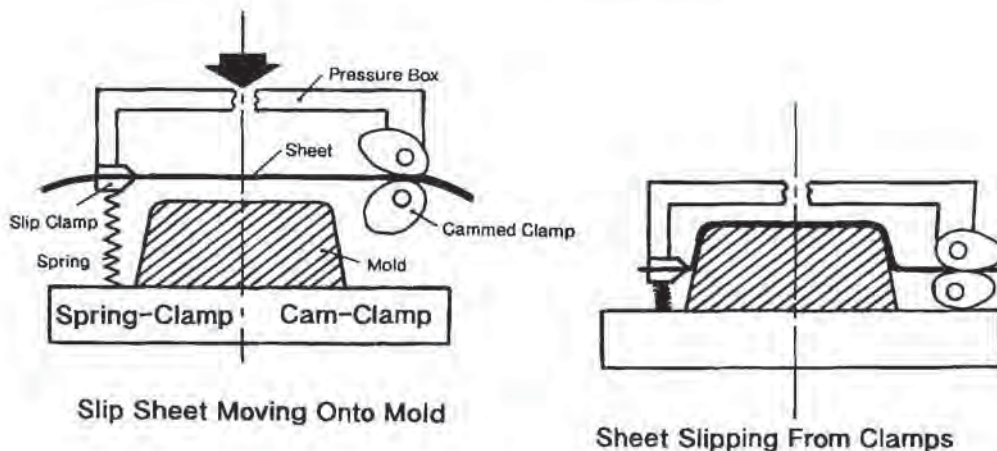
Slip forming. Spring-loaded sheet clamp on the left and cam-loaded sheet clamp on the right
